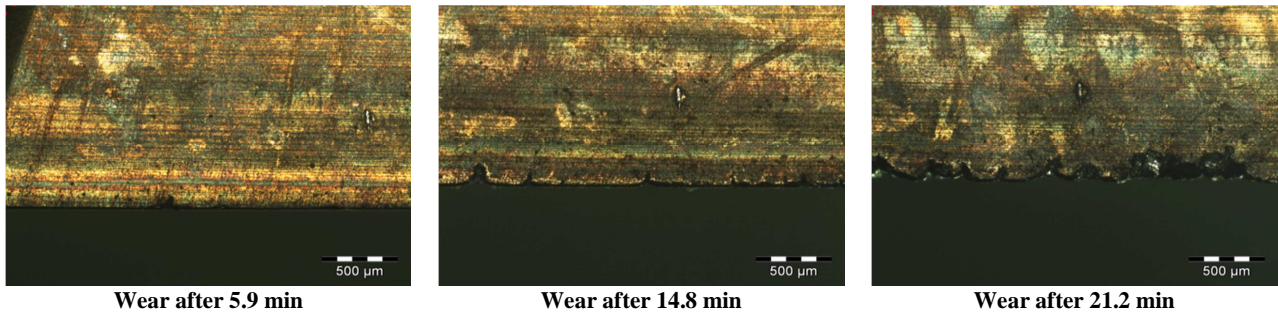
Wear scar progression for magneto-abrasive machining coating treatment under flood cooling conditions, machining 40CrMnMo7 with SECO inserts
